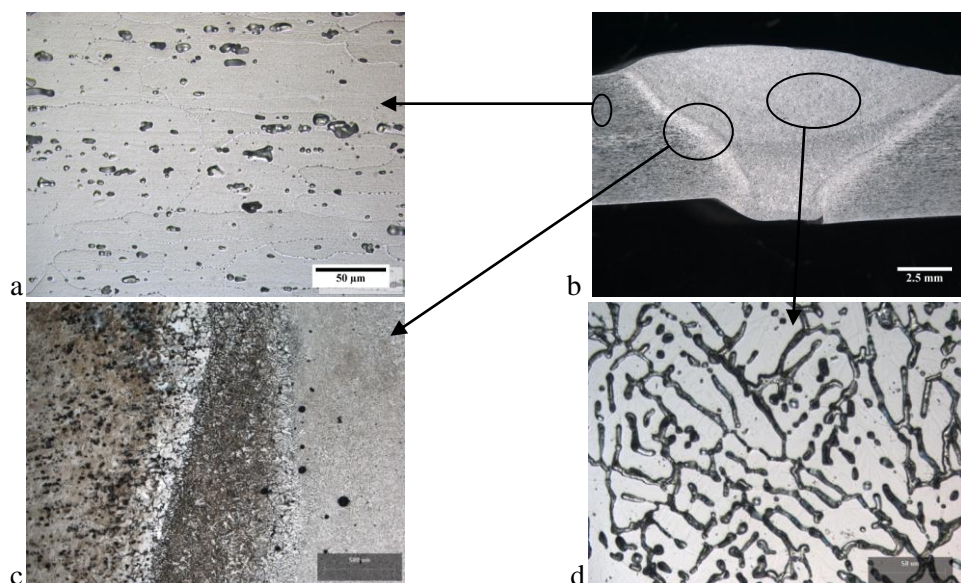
a) Al6061-T651 microstructure, b) FA-GMAW weld, c) HAZ/Weld interface and d) weld metal
